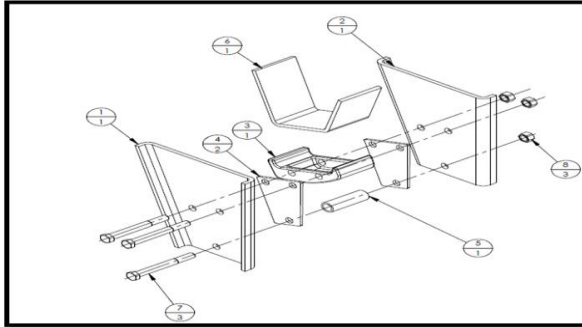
Rear Hanger Welding Assembly\PD900390
